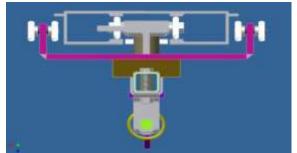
b. Cross Section View of Chain Guide and Trolley
